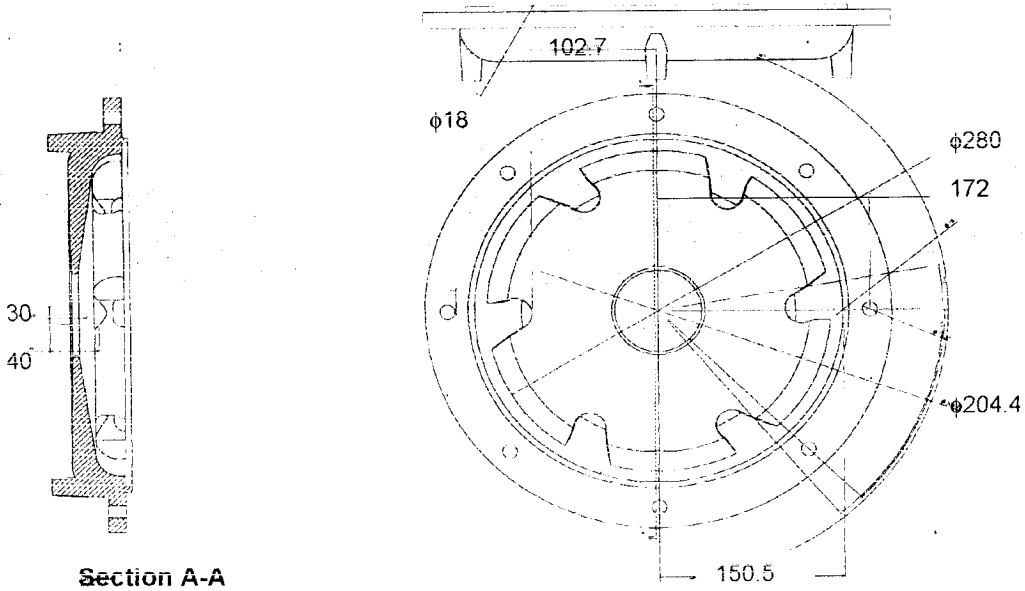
The Bearing Housing Section (All dimensions in mm, All tolerances ± 0.12 mm)
